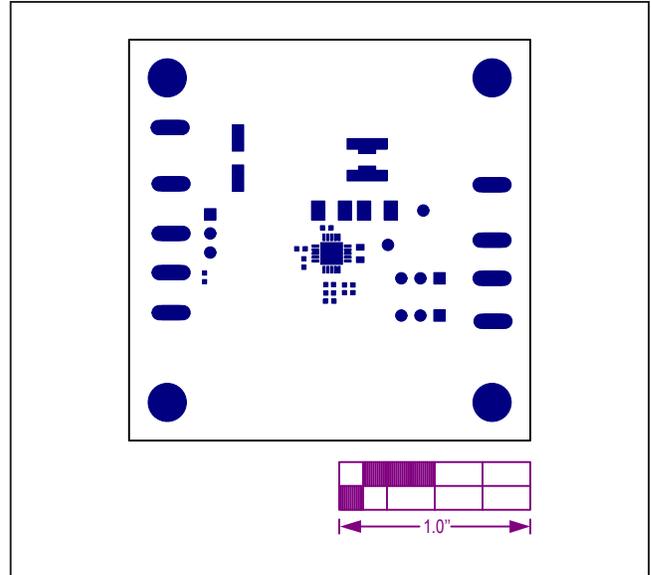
MAX17545 5V Output EV Kit Component Placement Guide—Top Solder Mask
